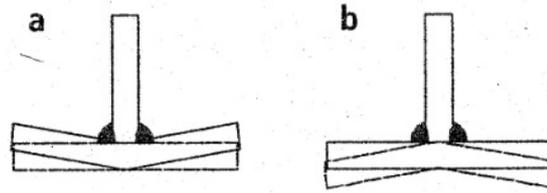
Scheme of formation of deformations: a – welding without using of indirect bend;
